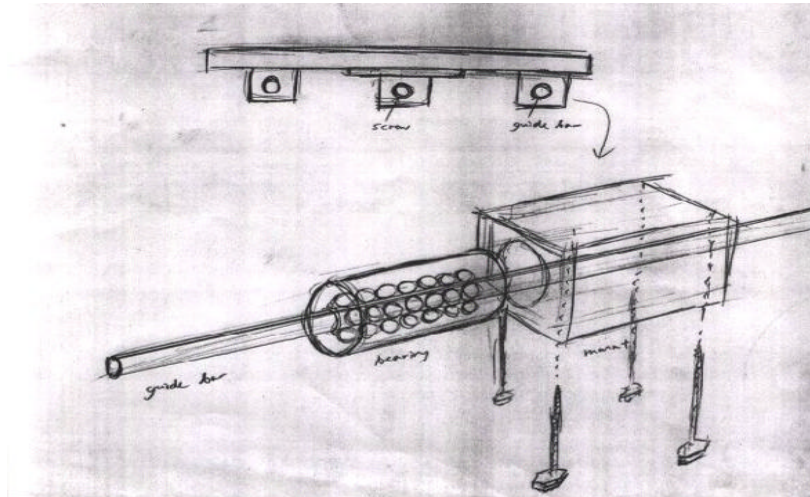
The linear bearings will fit into an aluminum block. This block will then be mounted to the base.
